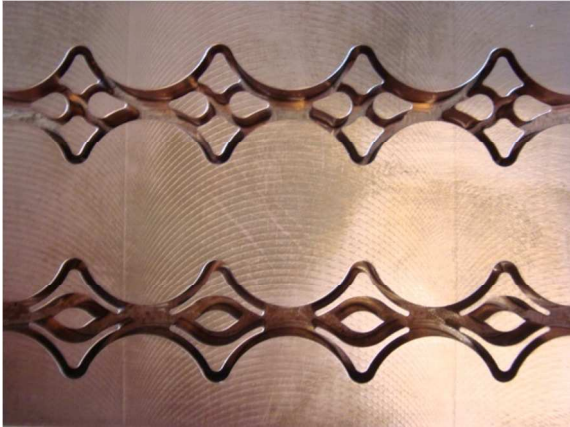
Detail of Criss-Cross (up) and Baffle (down) Channels cooling groups.
